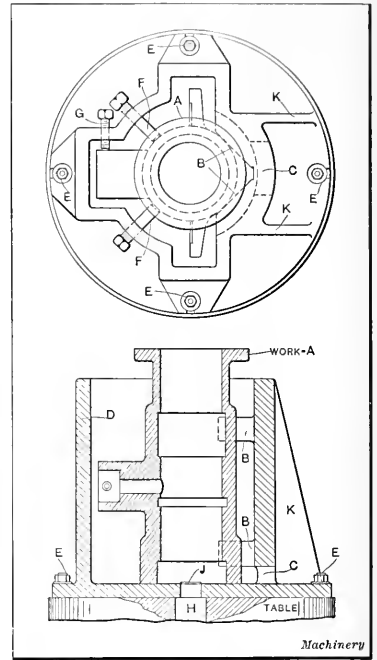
Pot Casting Fixture for holding Irregular Steel Castings on Vertical Turret Lathe
